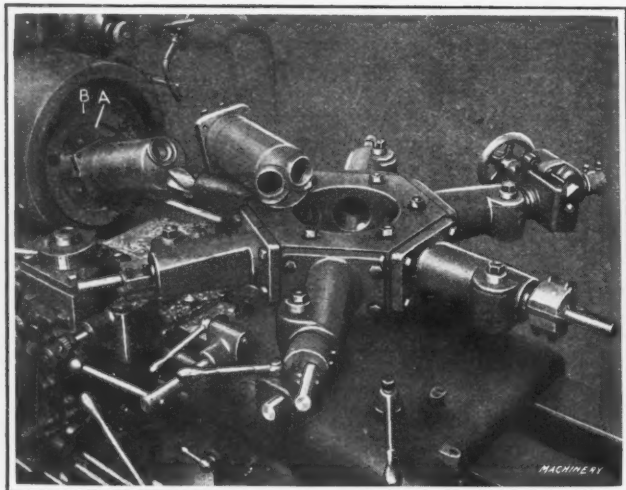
Machine provided with Tools and Special Indexing Fixture required in machining the Cylinder Head of a Water-cooled Airplane Engine Cylinder
